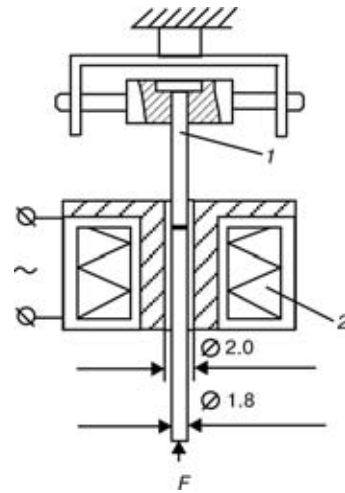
Schematic of loading of soldered joints: 1 — butt joint samples; 2 — heater
